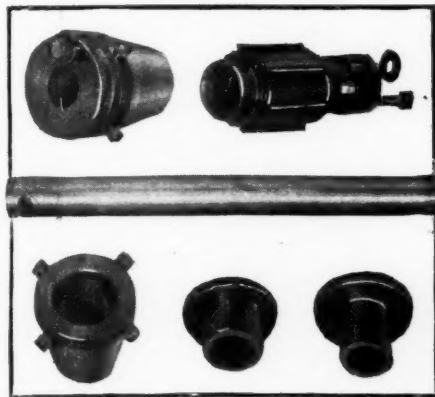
Martell aligning reamer. Left, top, shows supporting bushing assembled, and the three lower views show it dis-assembled. At the upper right the reamer itself is shown, and in the center is the reamer shaft.
